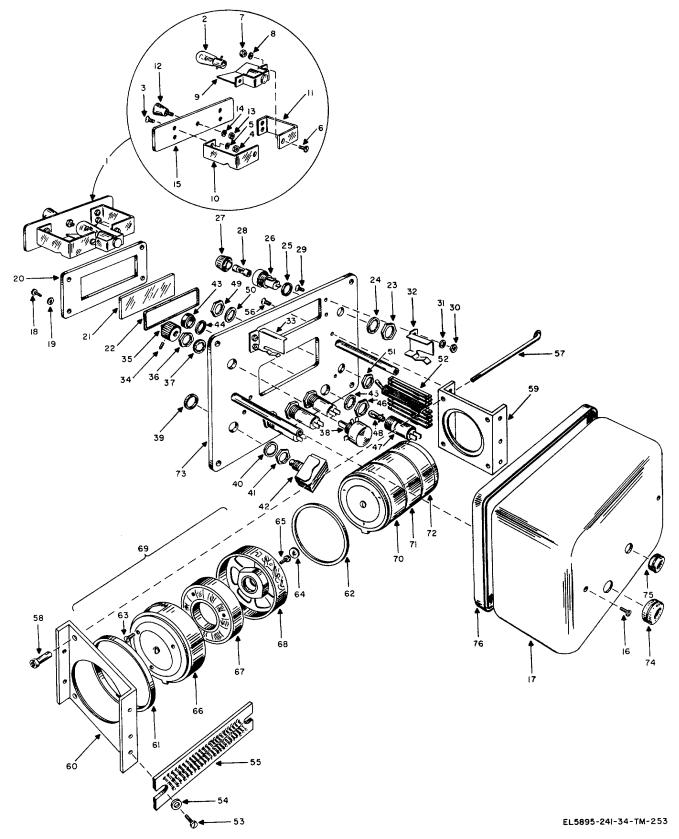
Indicator, Digital Display ID-54/FSW-8 (part of OA-2054/FSW-8), exploded view.
